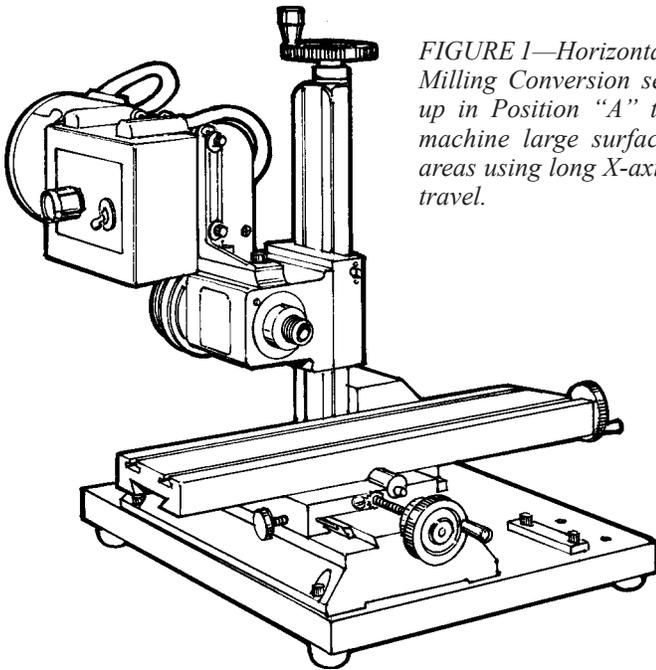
Horizontal Milling Conversion set up in Position "A" to machine large surface areas using long X-axis travel.
